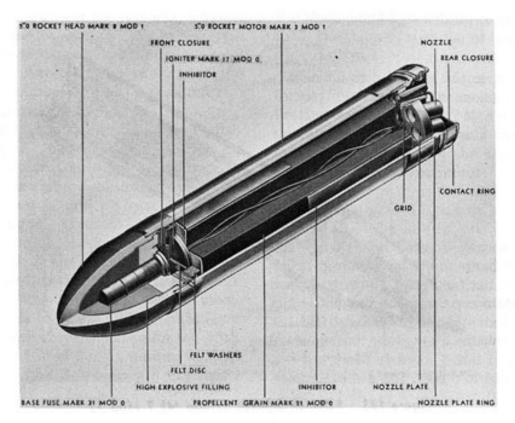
5.0-inch S.S.S.R. (Head Mk 8 Mod 1)
